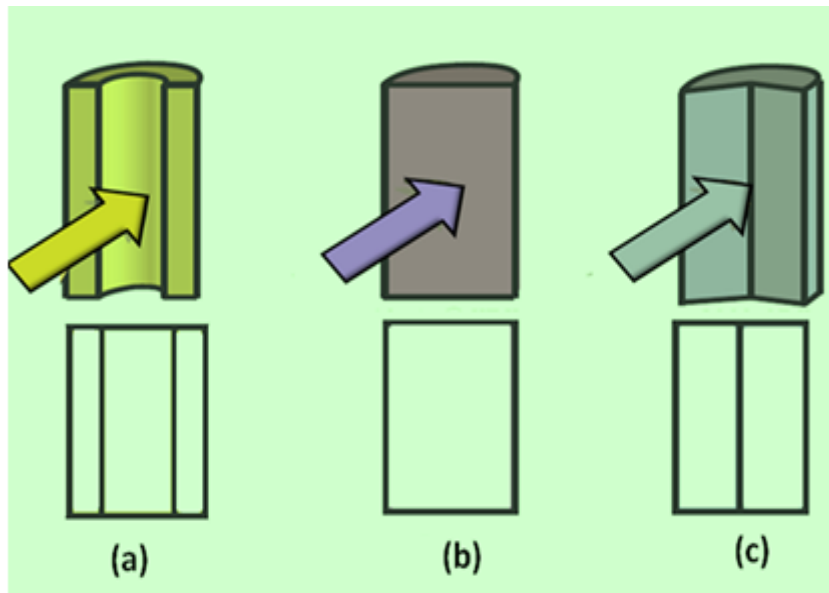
shows the pictorial view and front view of sectioned part of (a) a hollow cylindrical object (b) solid cylindrical object and (c) solid cylinder split in to two unequal parts.
